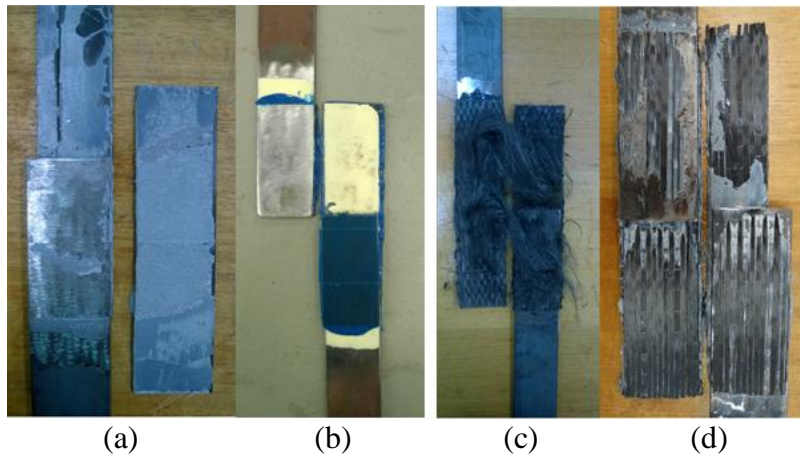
Typical failure modes: (a) and (b) adhesion failure, (c) interlaminar failure, (d) inter-laminar and cohesive failure
